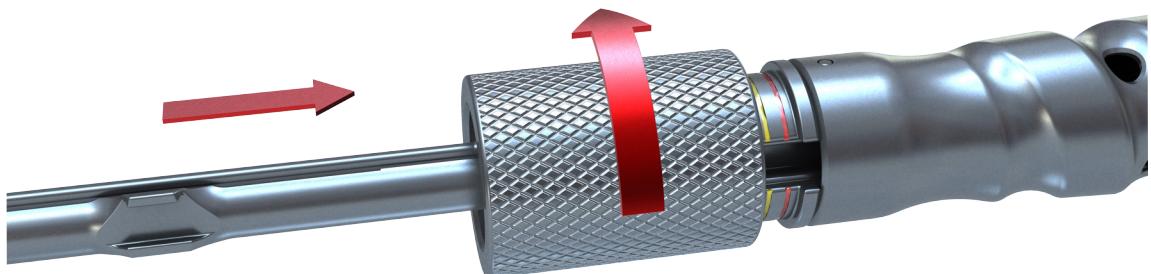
Main Core, Knob, and Depth Stop Components Unassembled
